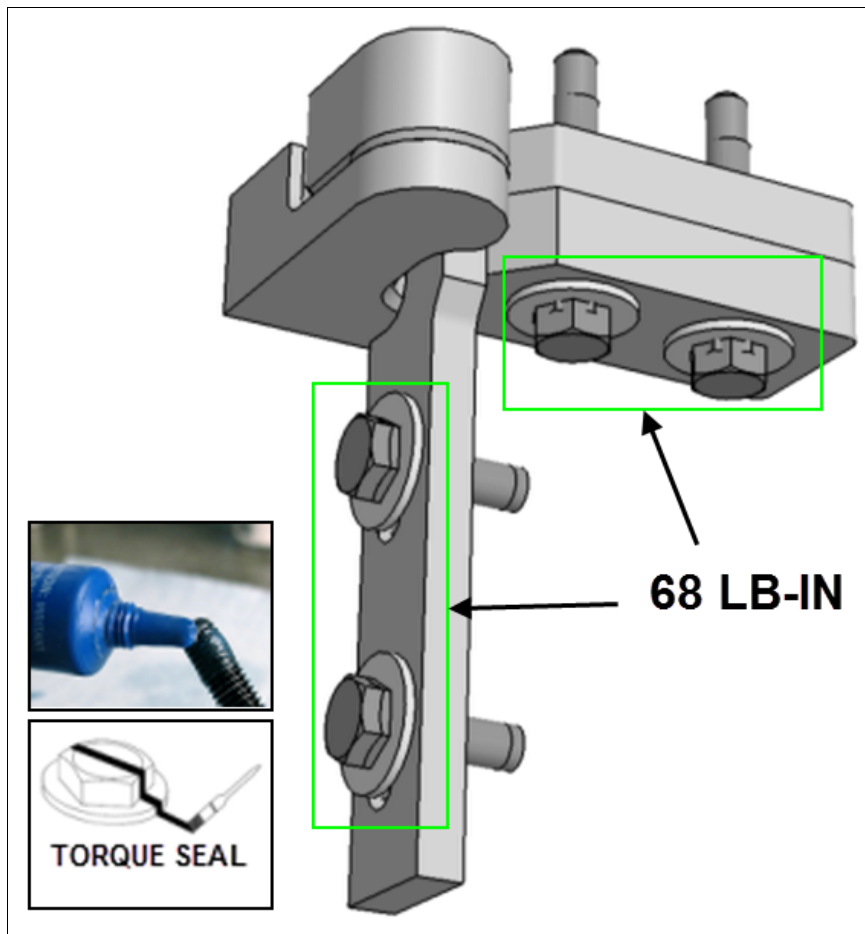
APPLY THREAD LOCKER, TORQUE & APPLY TORQUE SEAL
